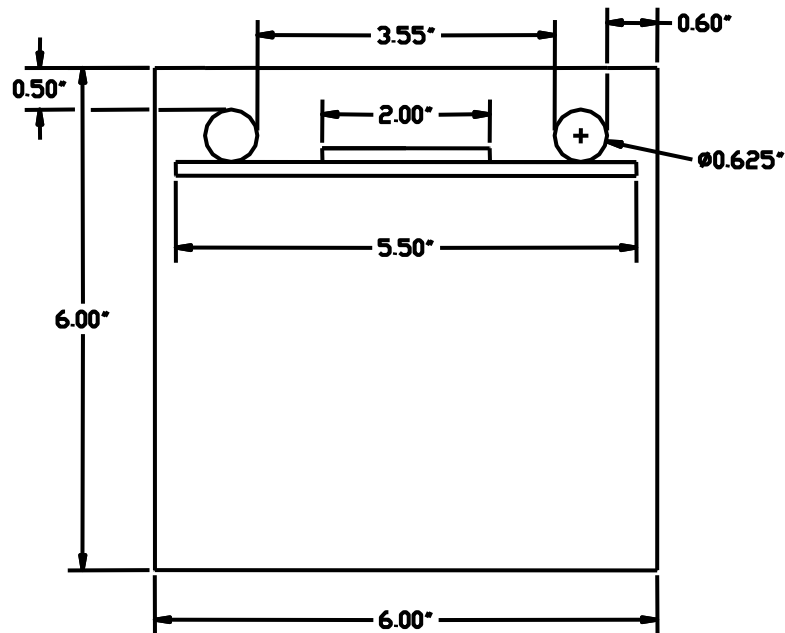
Cross Section of Prism Used in Prototype Sensor Testing
